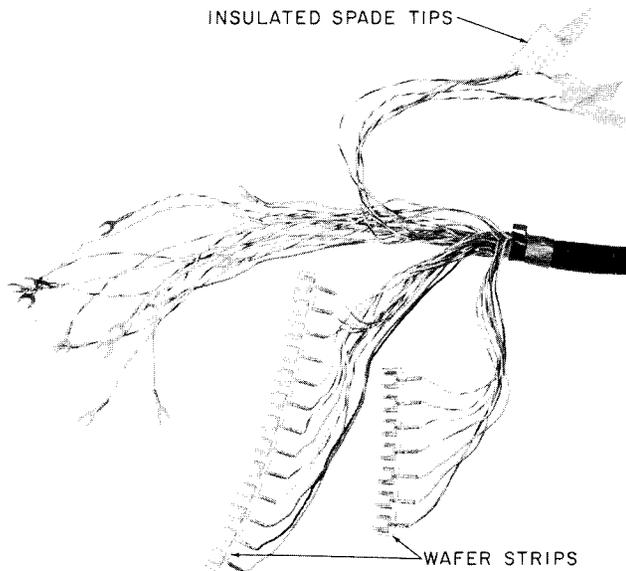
Slotted Wafer Strip End of Mounting Cord, Later Type
